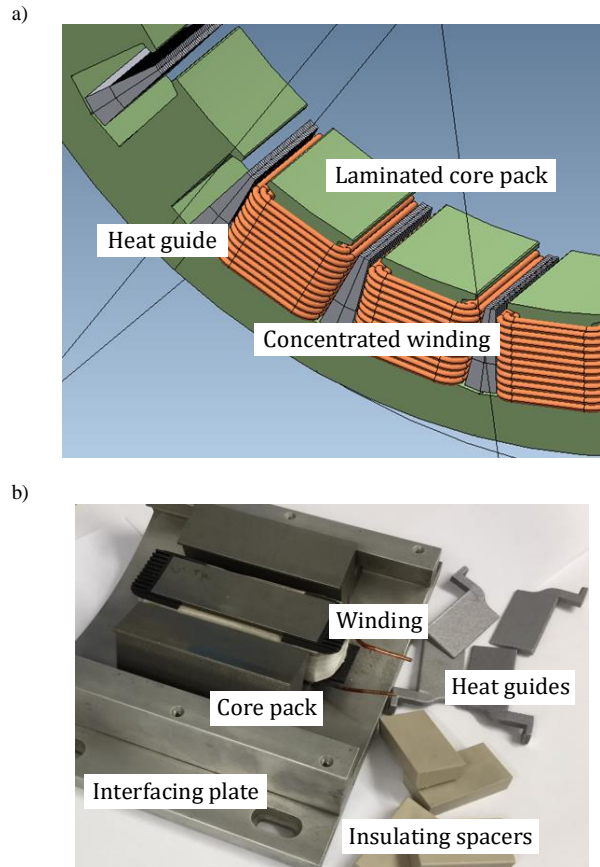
Outline of the stator-winding assembly a) concept of the stator-winding with HGs placed in the stator slots – 3D FE model representation, b) motorette hardware prior to final assembly and impregnation
